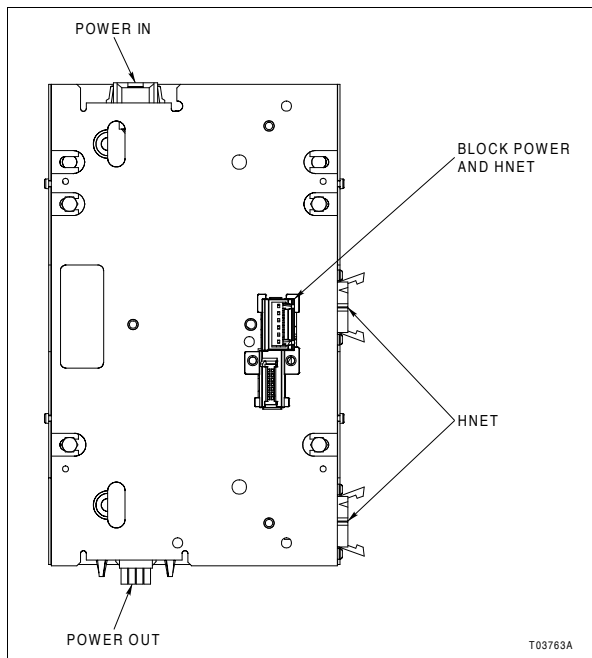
MCL-111 Block Mounting Column (Hnet Cover Plate Removed)
